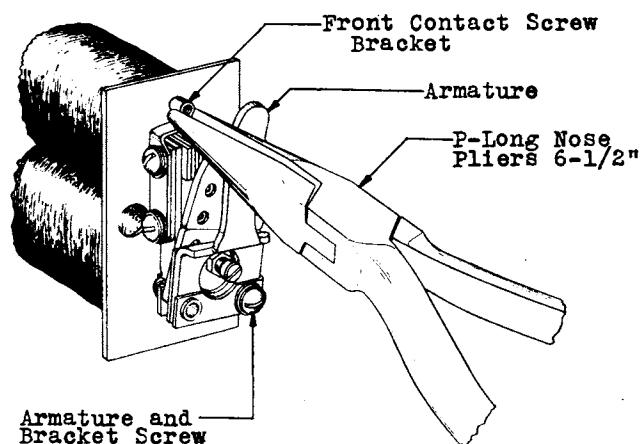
Method of Adjusting the Front Contact Screw Bracket
